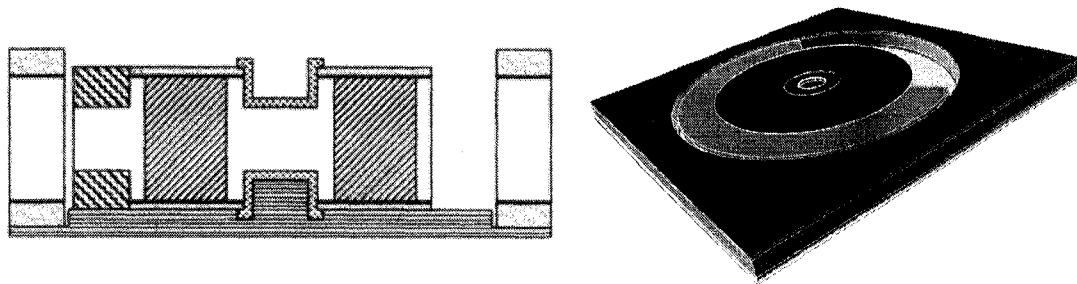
Rotor fabrication step 14 – patterning of the rotor geometry.
